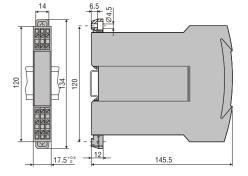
THETA 60I Transducer in housing S17, screw hole mounting brackets pulled out.
